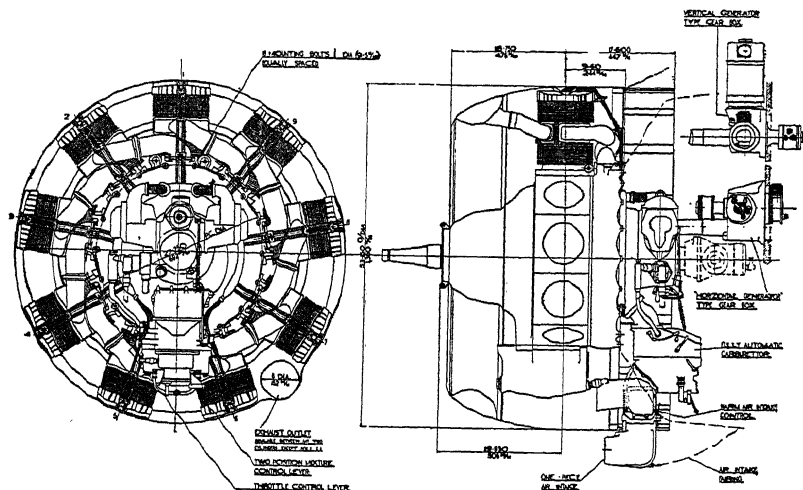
Schematic installation diagram of Bristol "Perseus XII" engine showing separate accessory gear box mounted on the bulkhead.
